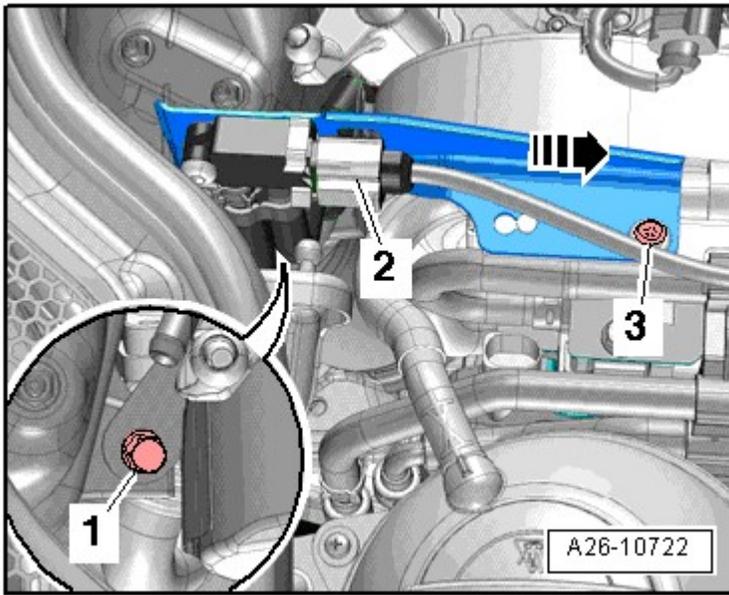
Disconnecting Connector -2- On Exhaust Pressure Sensor 1 -G450
